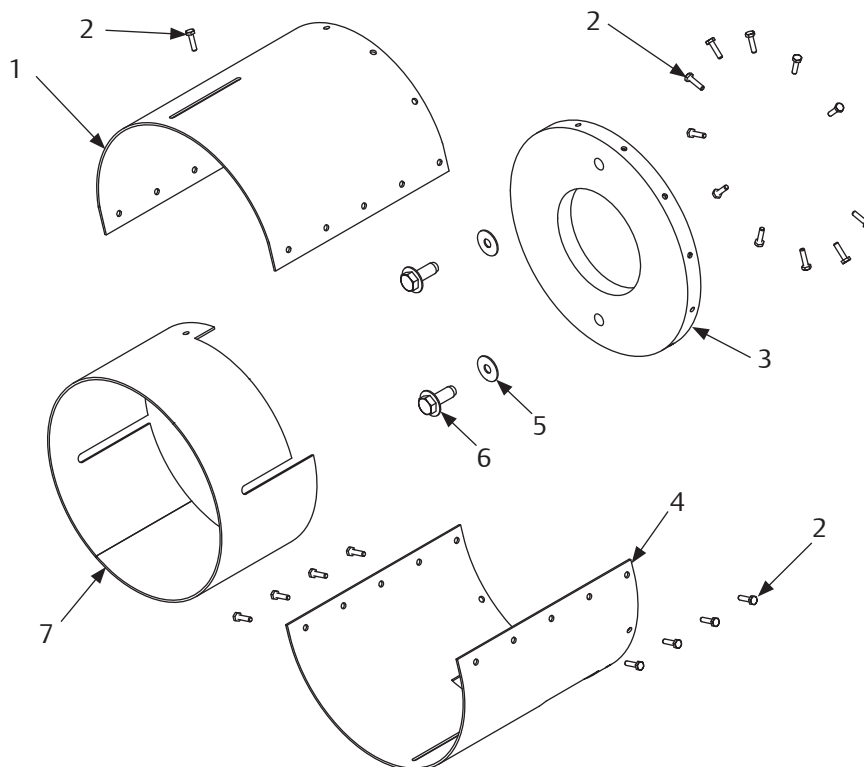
Coupling Guard Assembly (VPN A28412D shown)
